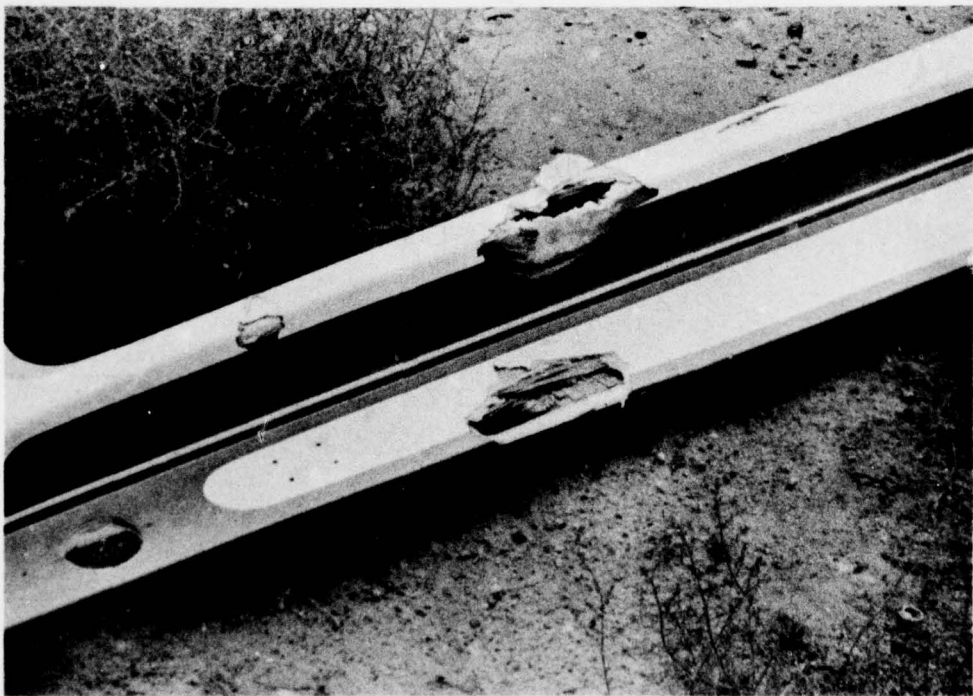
BOAT NO. 1 - DAMAGE ON STARBOARD COAMING CAUSED BY PROPELLER OF BOAT NO. 2
